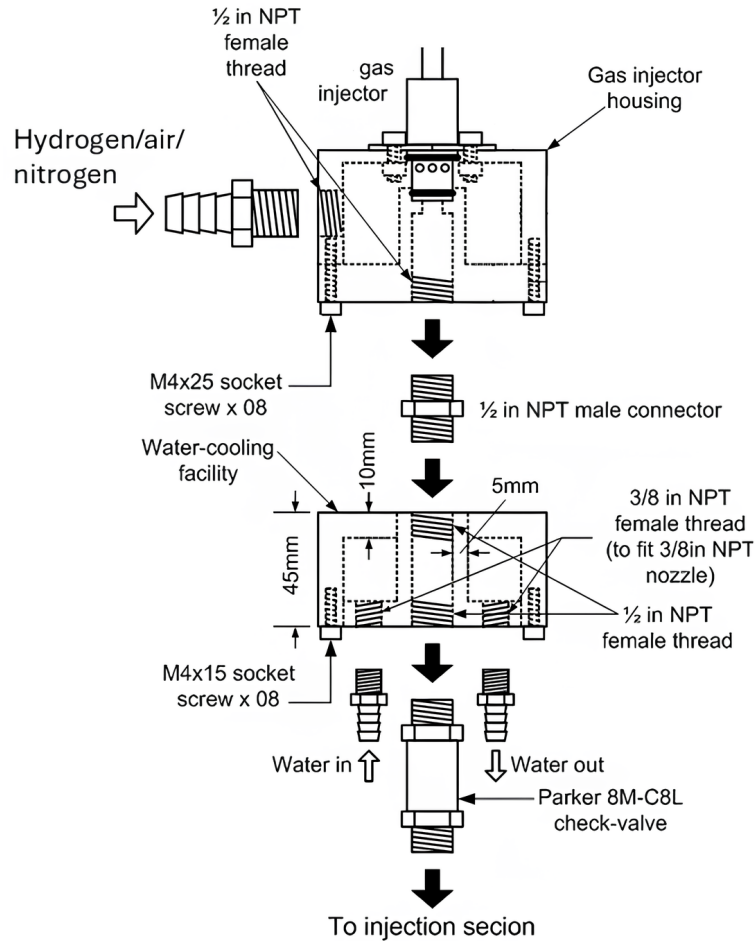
Gas injector housing with integrated water cooling and safety check valve [34]
